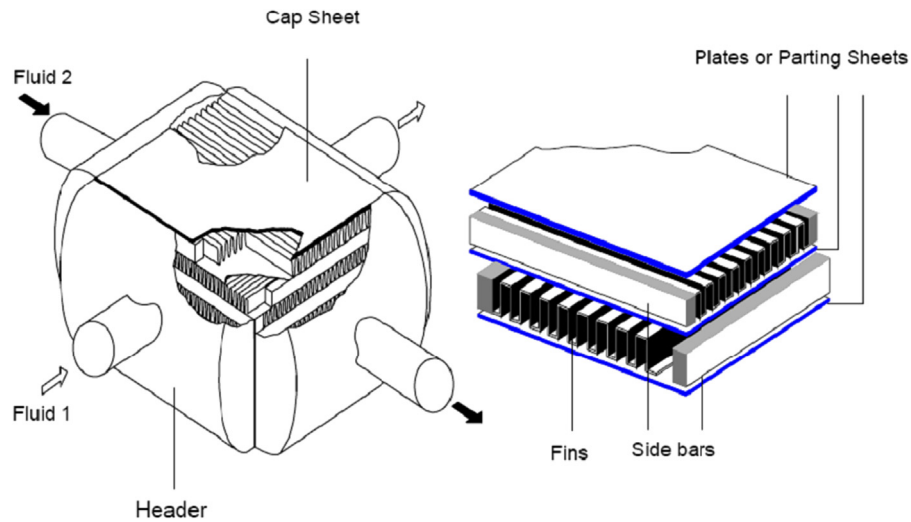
Compact plate-fin heat exchanger assembly and its detailed view.
